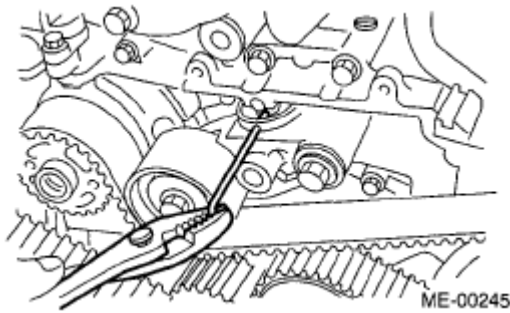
Locating Timing Belt Guide Mounting Bolts
